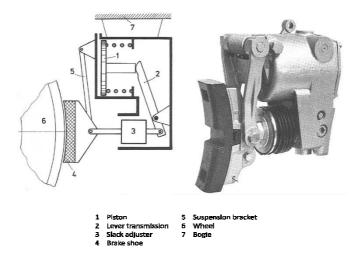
Tread brake unit (Saumweber, Gerum, & Berndt, 1990)
